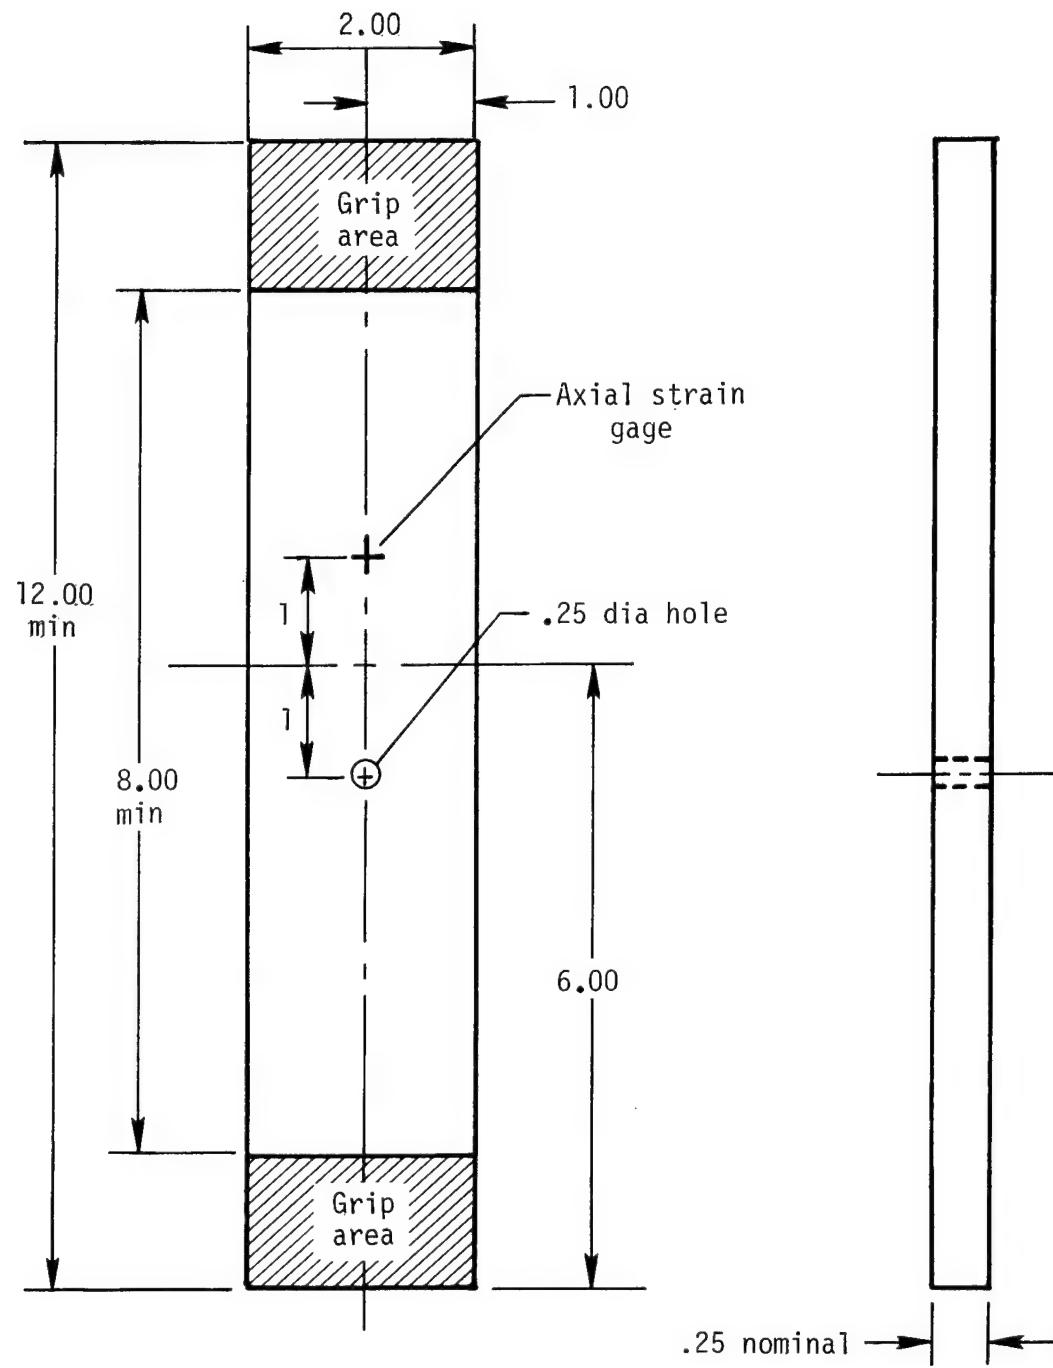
Open-hole tension test specimen. Dimensions are in inches.
